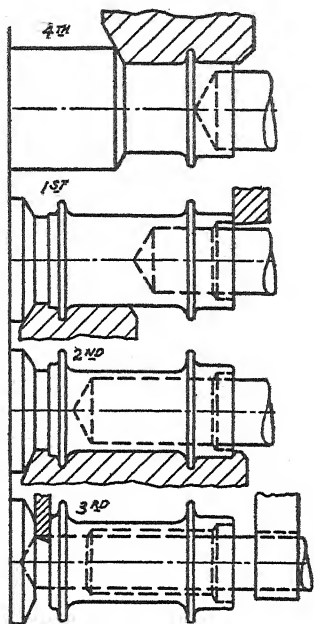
Machining a Hub Shell for a Bicycle Wheel 2 1/16 In. Dia. by 3 5/32 In. Long in a 3 5/16-In. Model GA Gridley 4-Spindle Automatic Screw Machine.
